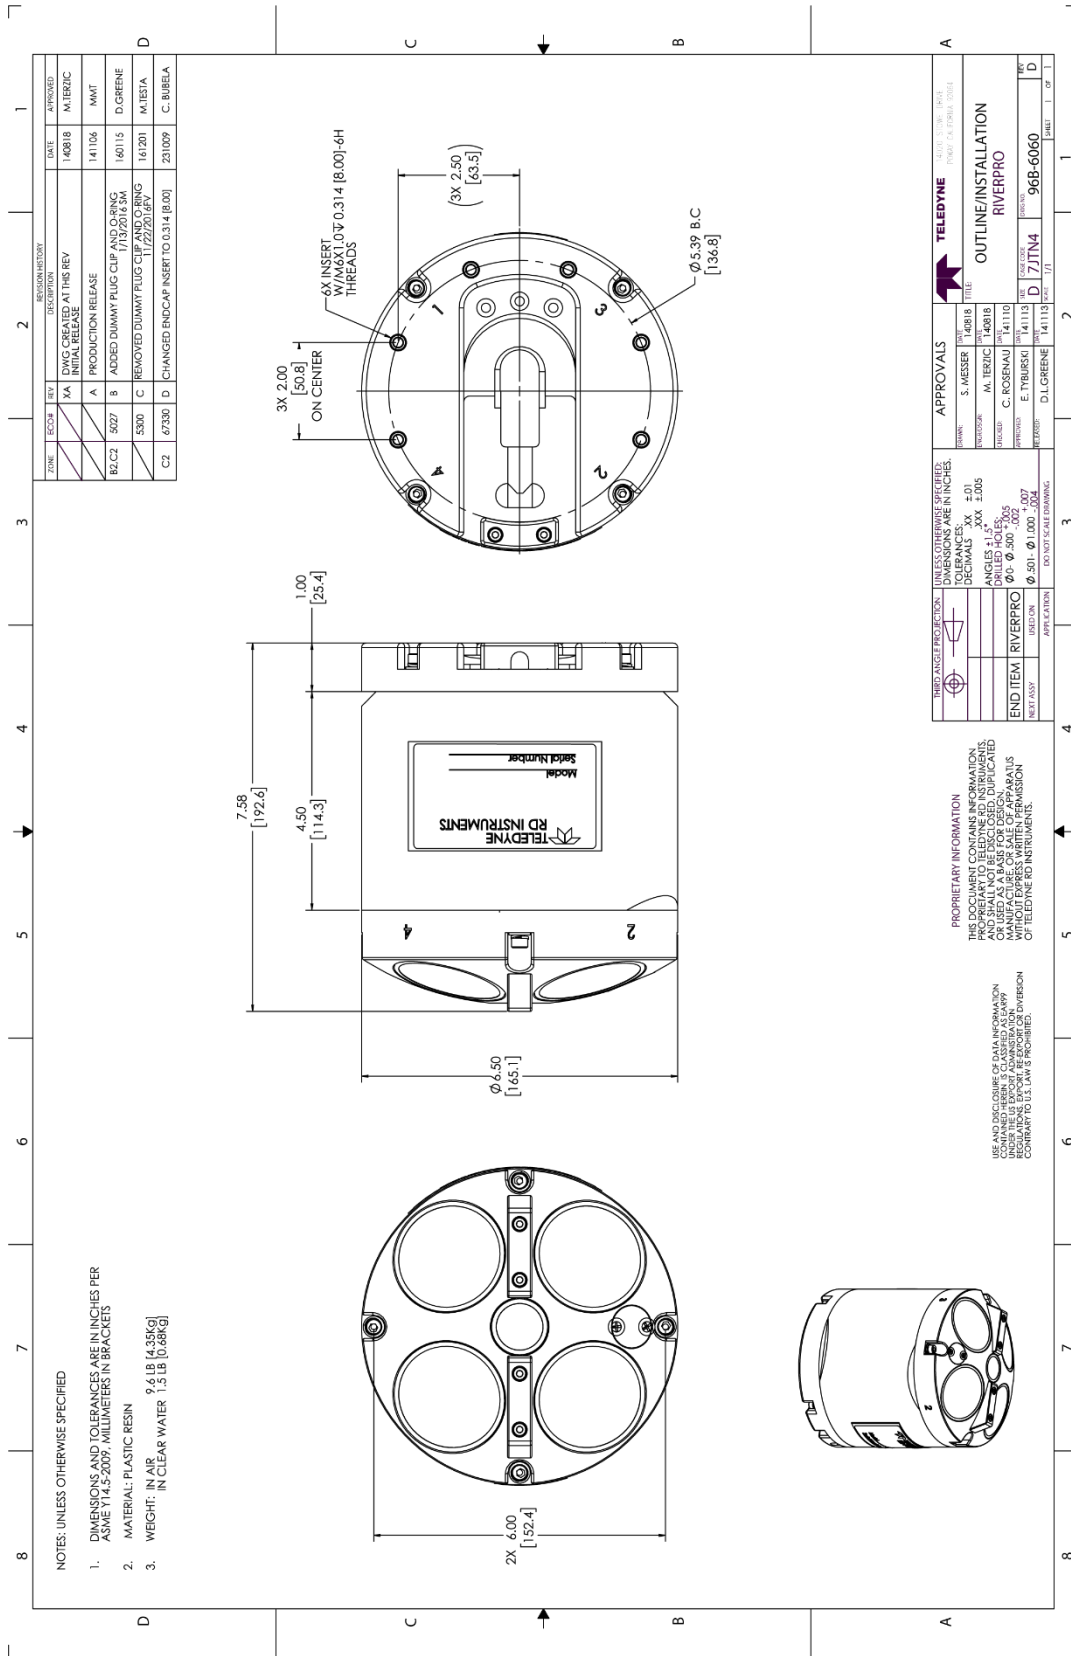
96B-6060 RiverPro 1200 kHz Outline Installation Drawing
